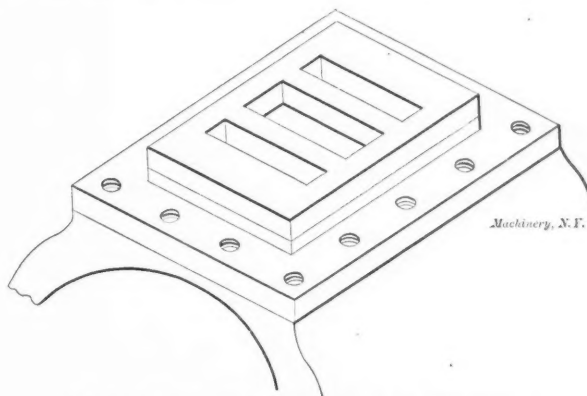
False Valve Seat for Locomotive Slide Valves.
